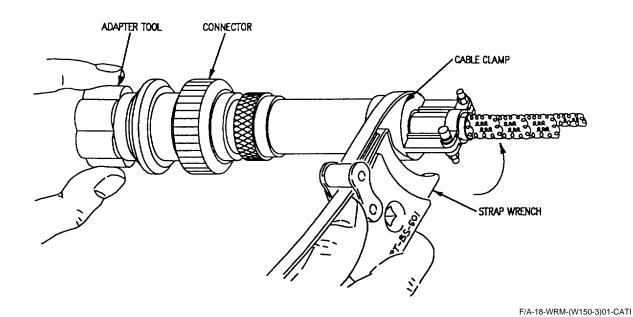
Strap Wrench BT-BS-601 in Position to Remove Saddle Clamp Assembly
